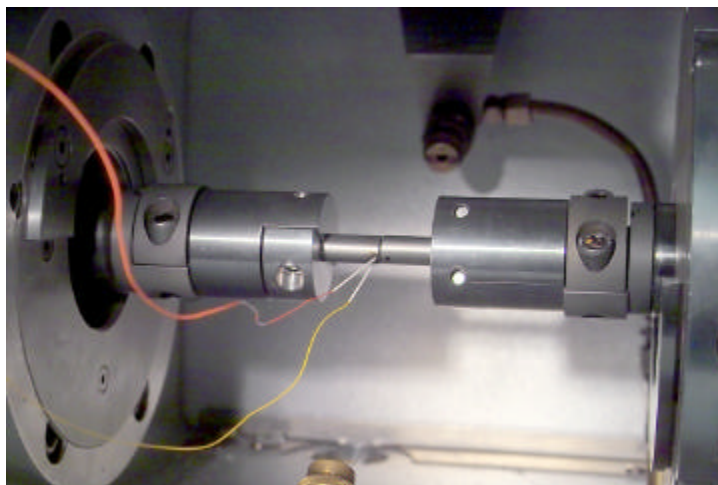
Simulated fuel cladding (left) and end cap (right) prior to welding.
